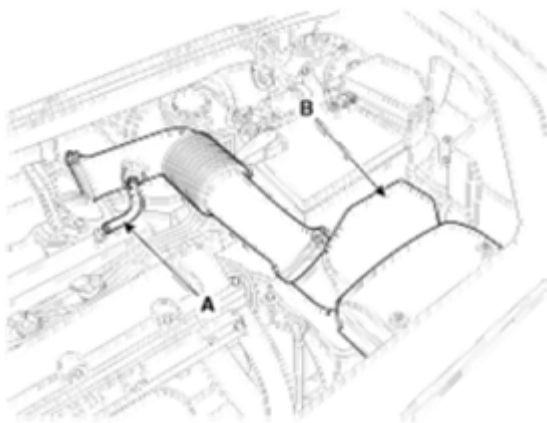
Identifying Breather Hose & Air Cleaner Assembly
